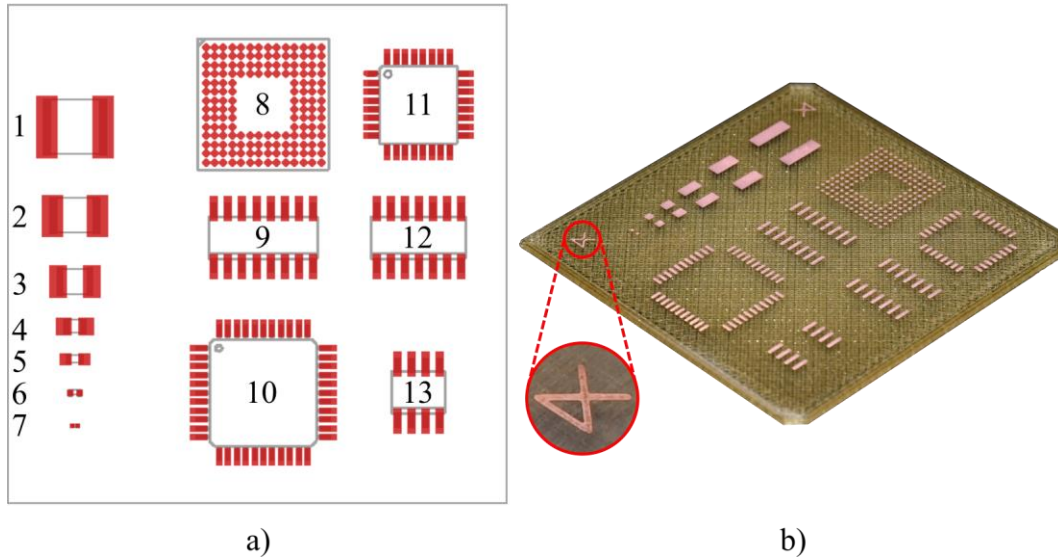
Test board design to demonstrate surface mount soldering capabilities a) schematic. b) Final board pre-soldering with a close-up of the vision alignment fiducials
